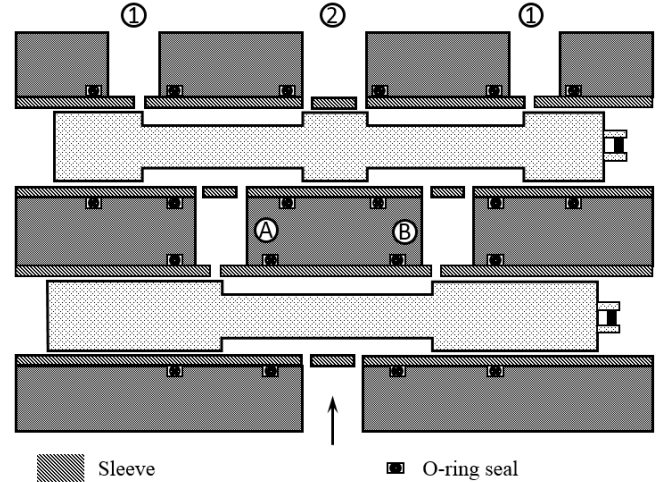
VALVE ILLUSTRATION SHOWING THE SLEEVE AND O-RING SEAL LOCATIONS. SLEEVE PORT LOCATIONS ARE REPRESENTED BY A SINGLE PORT.
